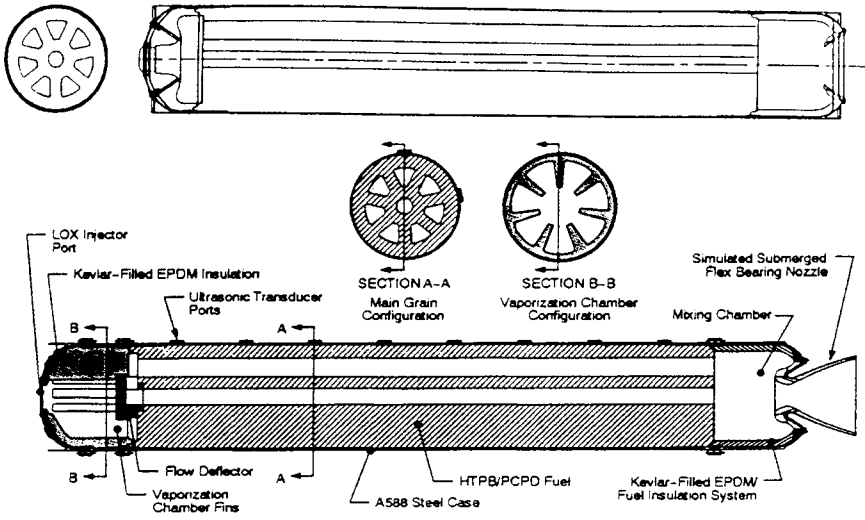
Layout of 250,000-lbf HPDP hybrid motor layout [3].
